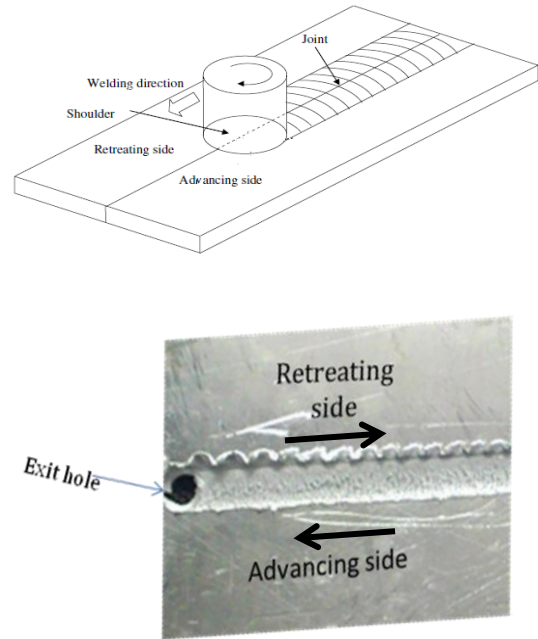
(a) Schematic illustration of the Friction Stir Welding process [1] (b) An FSW weld between Aluminium sheets
